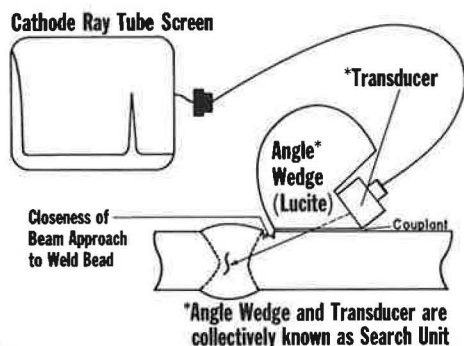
Basic ultrasonic weld testing scheme.
